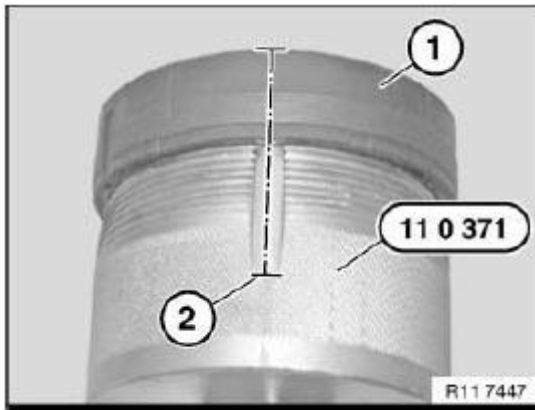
Identifying Crankshaft Seal And Cutting Line With Special Tool (11 0 371)
